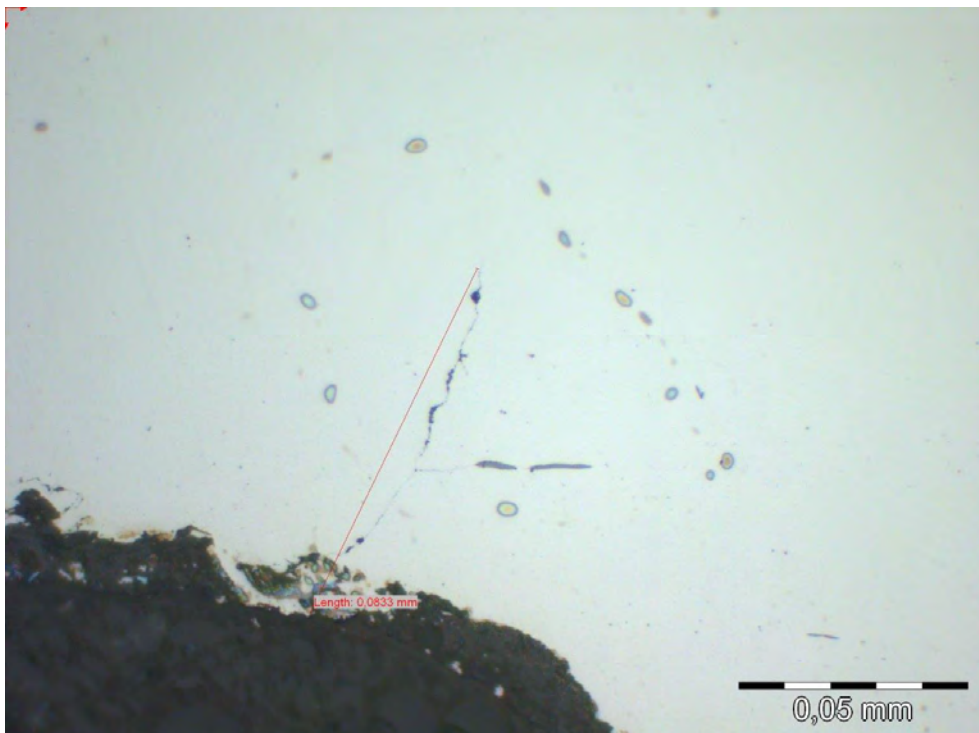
Crack at segment A, fourth ridge on barrel no. 8832/6713
